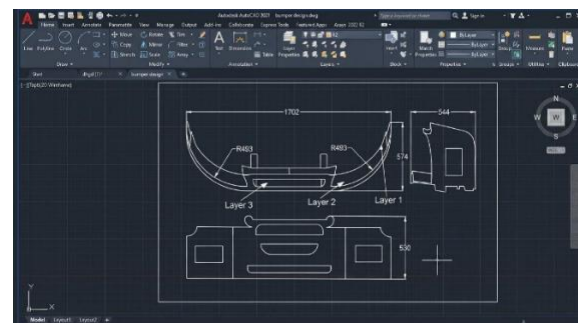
2D Drawing of Maruti Suzuki Front Bumper using AutoCAD 2021
